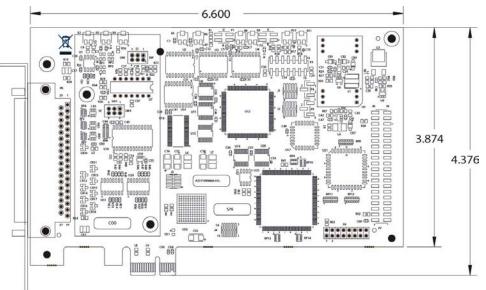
PCIe-DAS1602/16 circuit board dimensions (inches)
